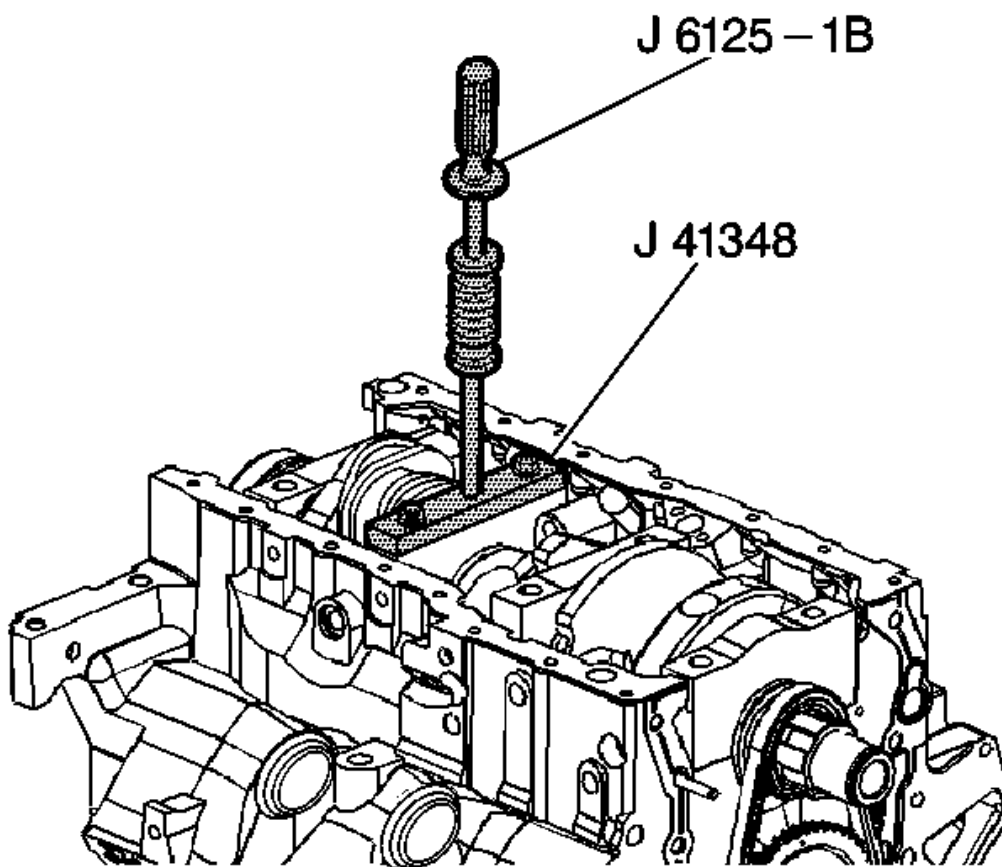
Removing Crankshaft Main Lower Bearing Caps
